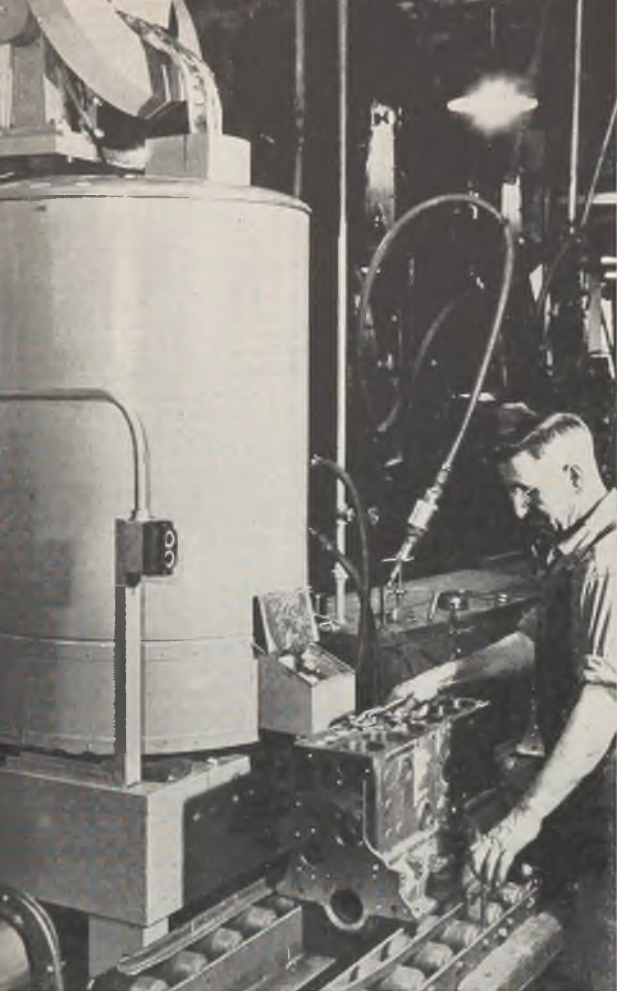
Standard Deepfreeze unit converted for production line assembly use by Dodge Division of Chrysler Corp. Every time operator trips control lever, a valve insert ring chilled to 120 degrees below zero is discharged ready for assembly into exhaust valve holes, six to an engine block
